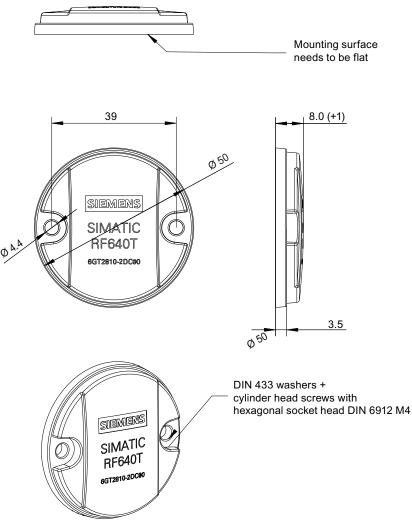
SIMATIC RF640T Gen 2 UHF Tool Tag Version 1
